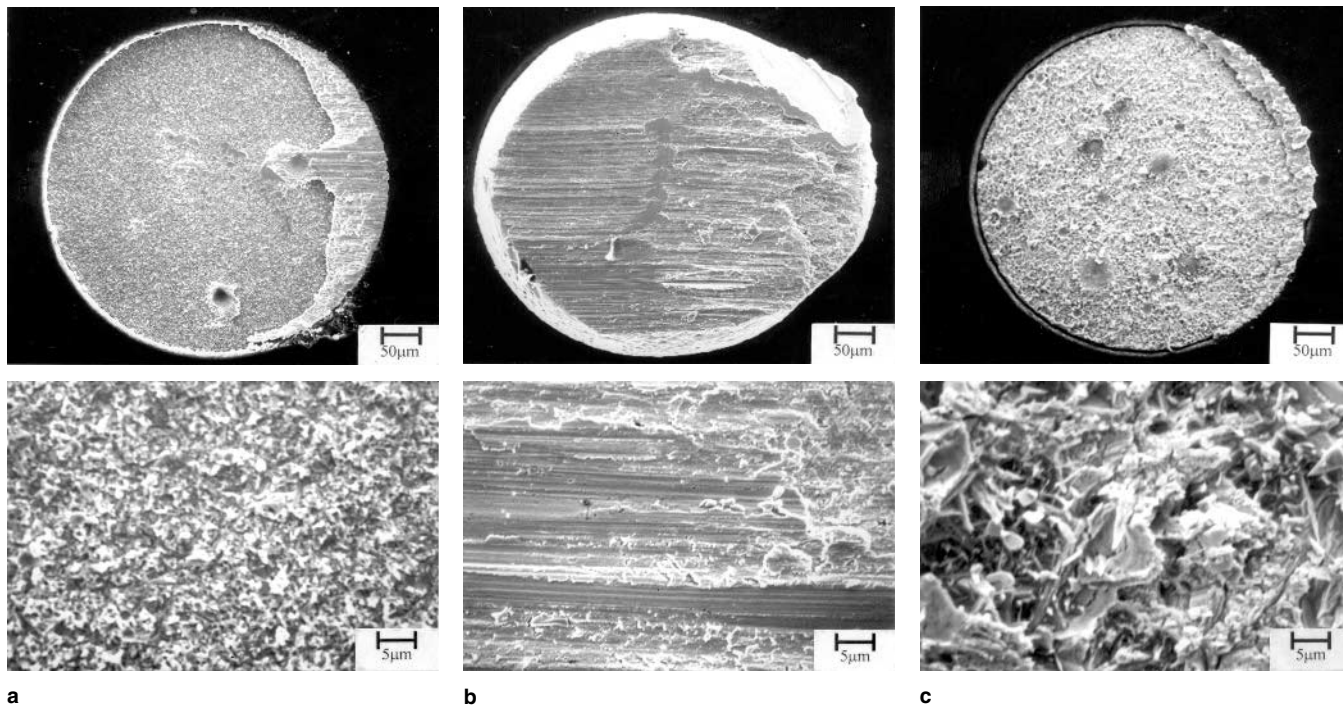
Fractography of Sn-20In-0.8Cu solder joints in BGA packages used in this study after ball shear testing: (a) after reflow; (b) 75°C aging, 1,000 h; and (c) 115°C aging, 1,000 h.
